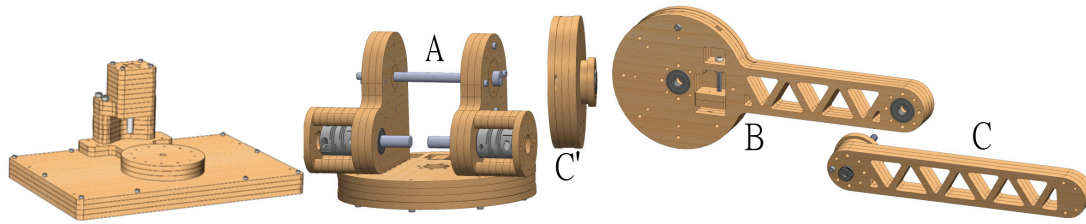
The parts needed to be assembled by user: the base driving the body A, that in turn drives body B and, indirectly through C', body C.
